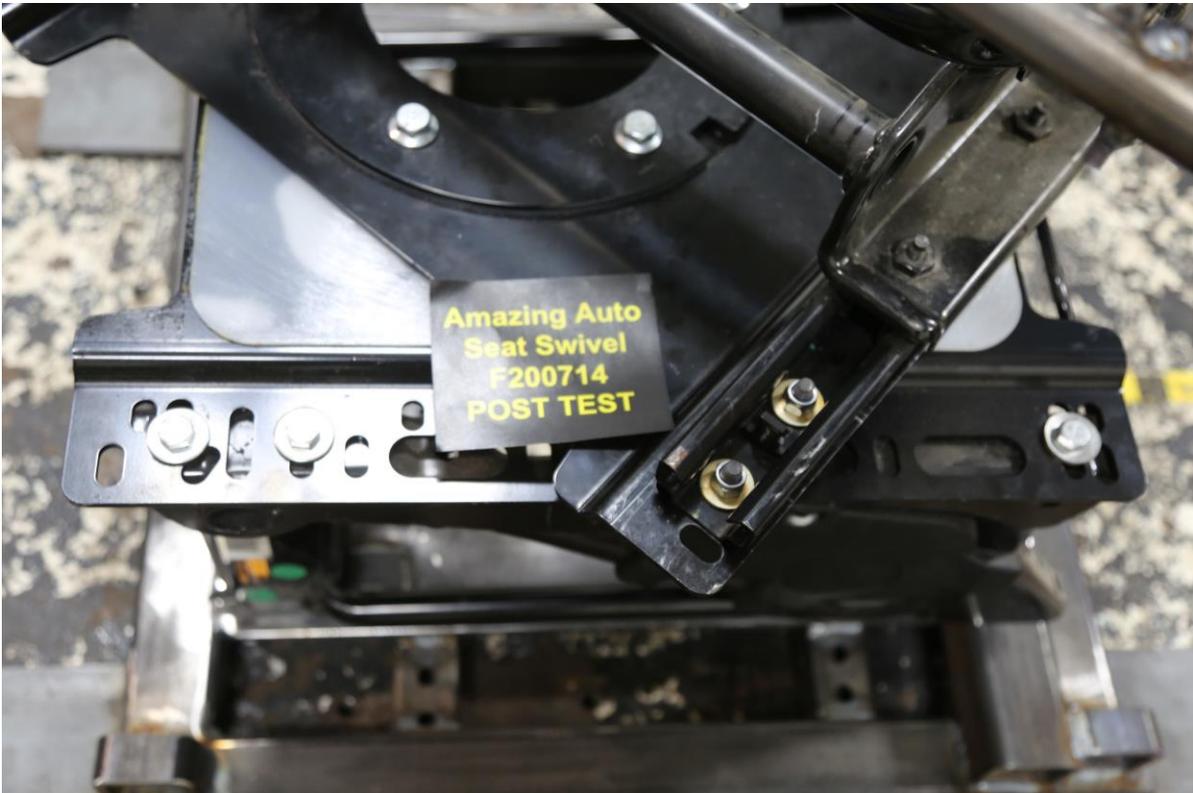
Swivel to Seat Base Right Side Attachment Bolts View
